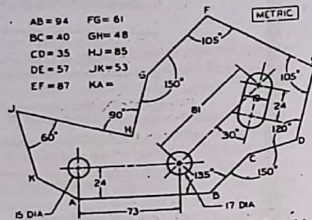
Shear Plate. Using Layout A-2 or A4-2 (adjusted), draw accurately in pencil. Give length of KA. Omit other dimensions and notes.
